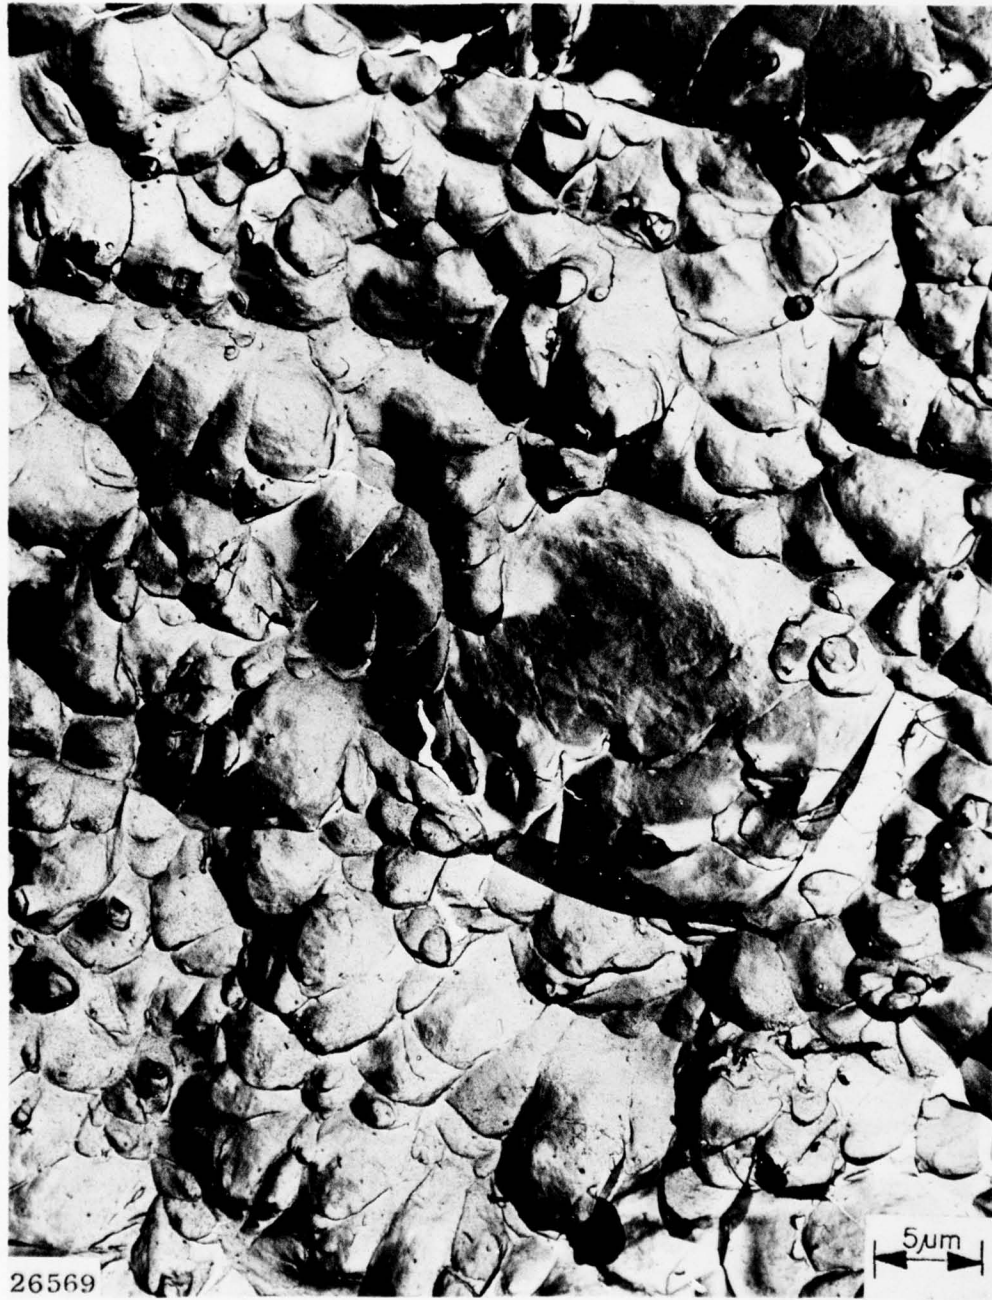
Microvoid coalescence in pop-in region in weld metal of EB weld joint fracture of 12.7-mm-thick HY-130 DT specimen. Not preheated.
